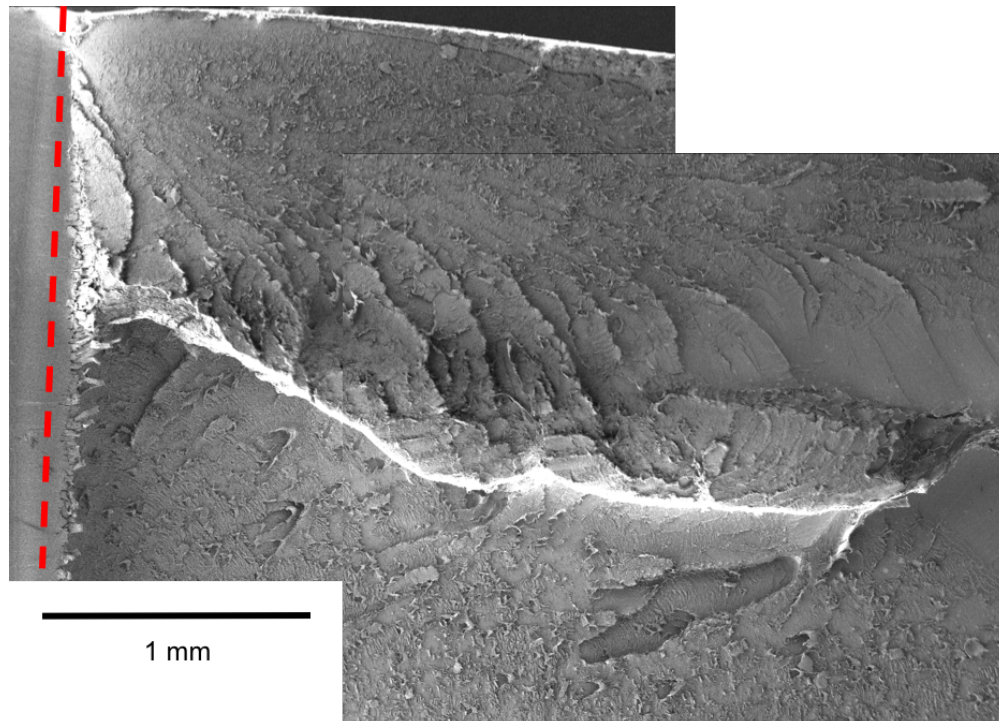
Fractography of an annealed sample shows two separate fracture planes from the two crack tips that merged after several millimeters of crack growth.
